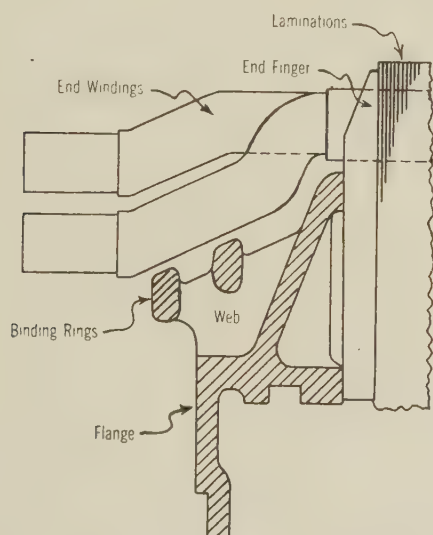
SKETCH SHOWING ARRANGEMENT OF END WINDINGS, FINGERS, BINDING RINGS, AND FLANGES
